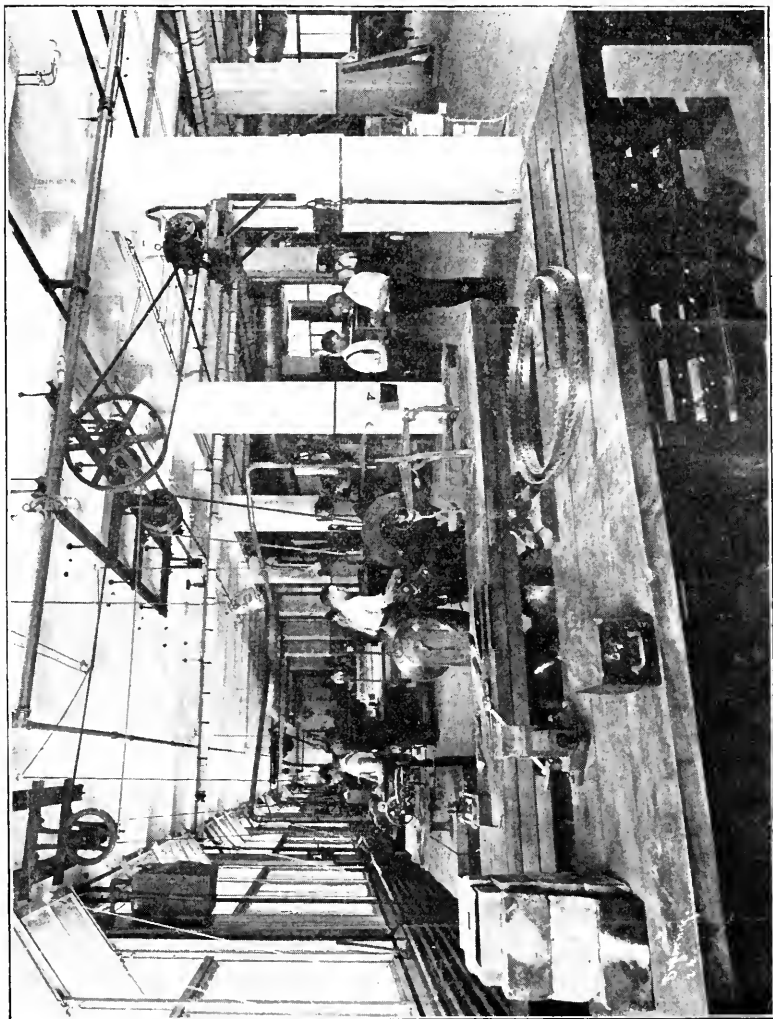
INTERIOR VIEW SHOWING EQUIPMENT DETAILS.
